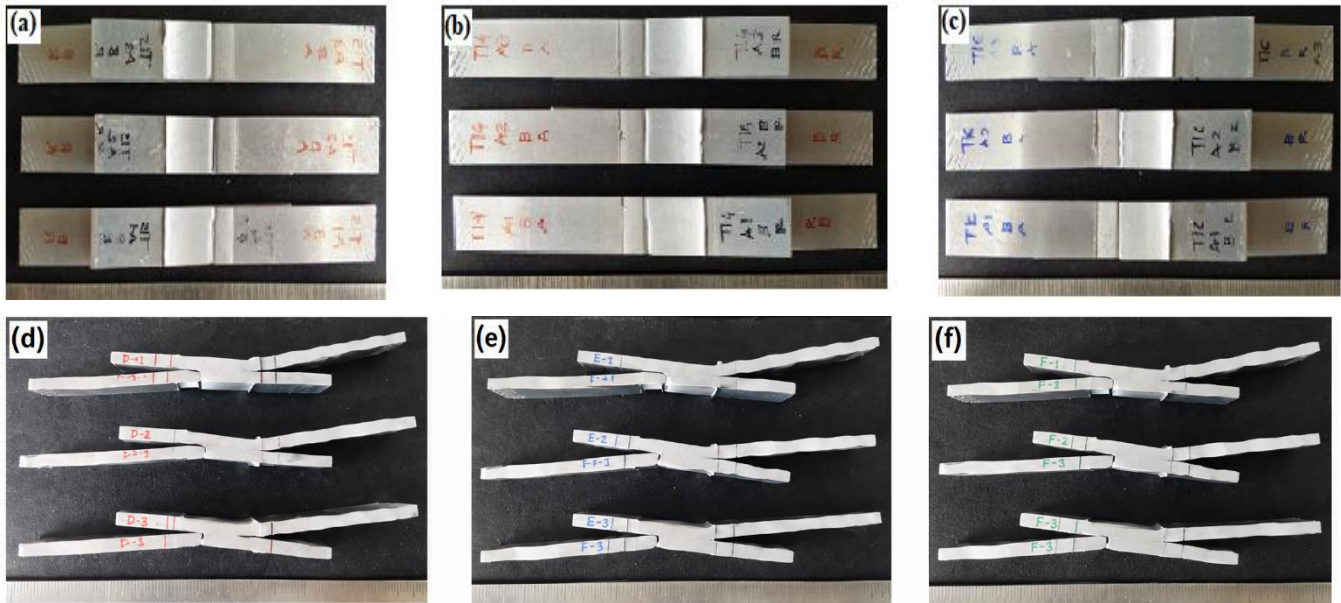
Tensile-shear fracture in specimens: top views- (a) Spindle speed- 280 RPM, (b) Spindle speed- 350 RPM, (c) Spindle speed- 445 RPM, side views- (d) Spindle speed- 280 RPM, (e) Spindle speed- 350 RPM, (f) Spindle speed- 445 RP.
